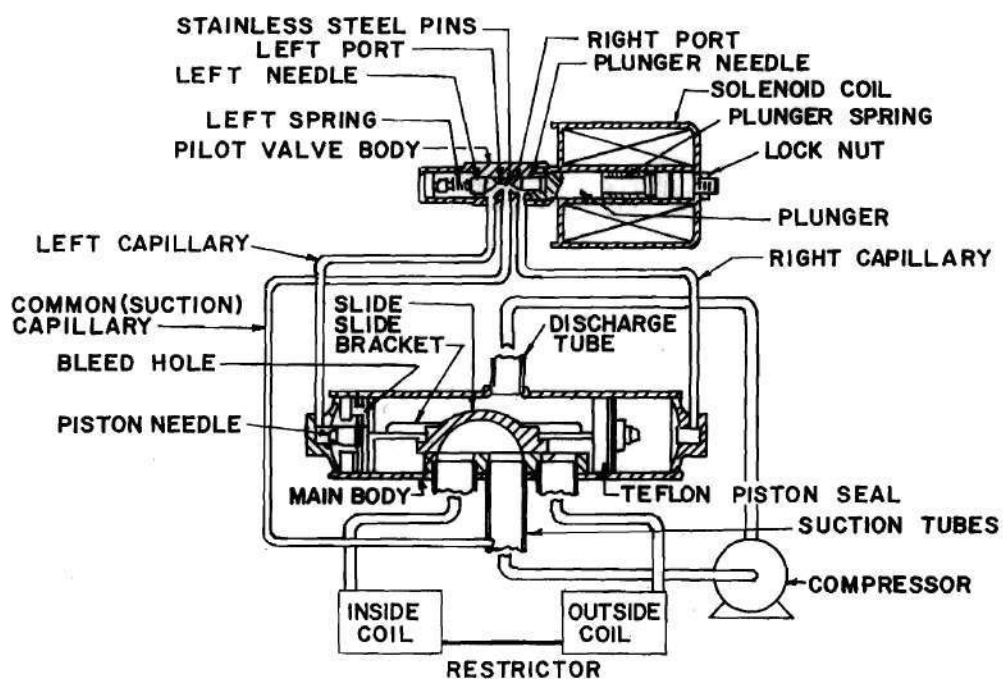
⁽⁹⁾ SECTION VIEW OF REVERSING VALVE
